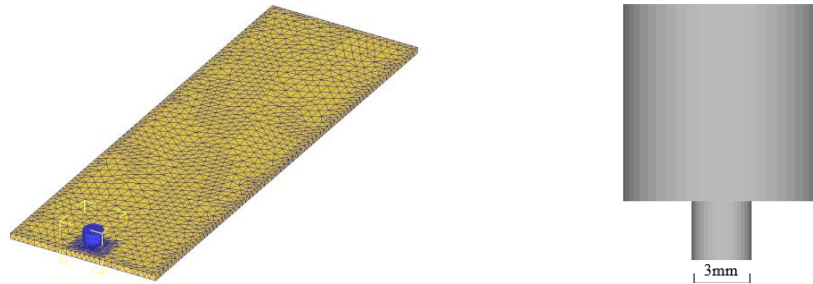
FSW model and welding tool before wear: FEM model (left) and welding tool (right).
